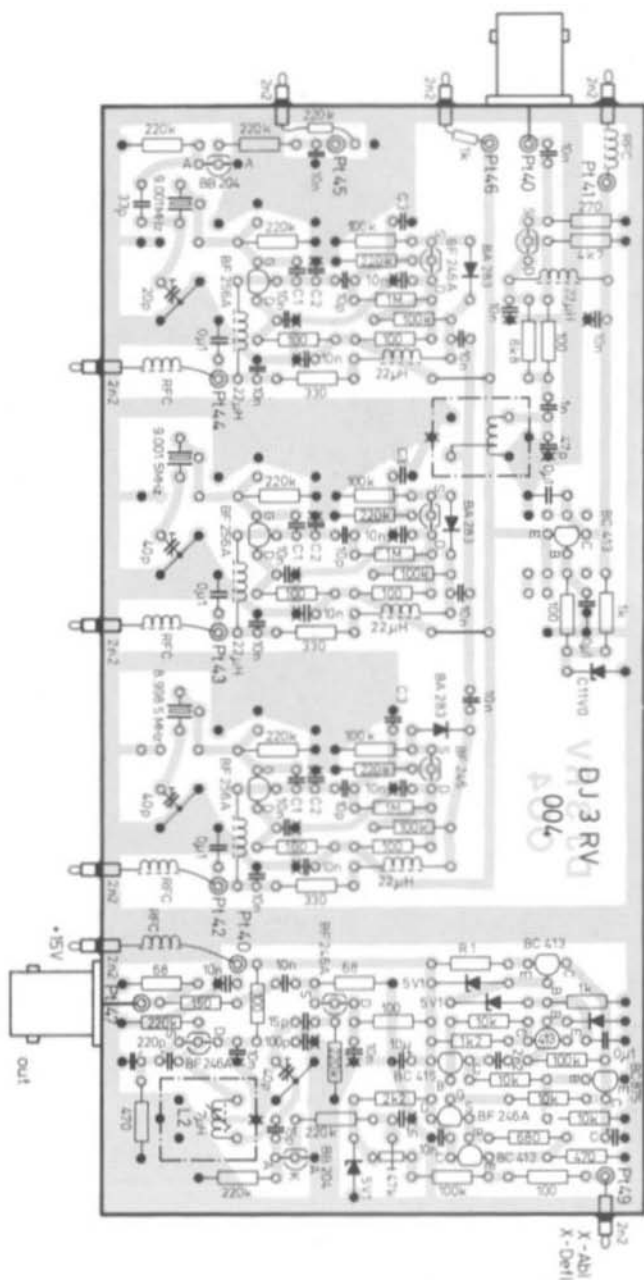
Component location plan of the double-coated PC-board DJ 3 RV 004; the positions marked with crosses on the PC-board should be provided with through-contacts.
